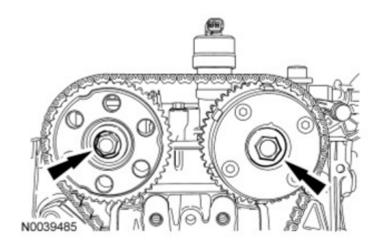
Locating Camshaft Bolts Courtesy of FORD MOTOR CO.
